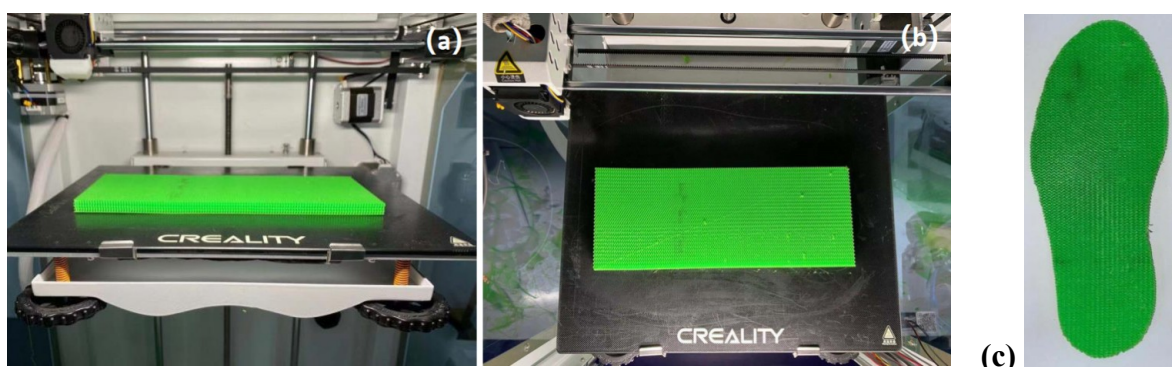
Manufactured specimen, (a) Side view, (b) Top view, (c) Trimmed out insole
